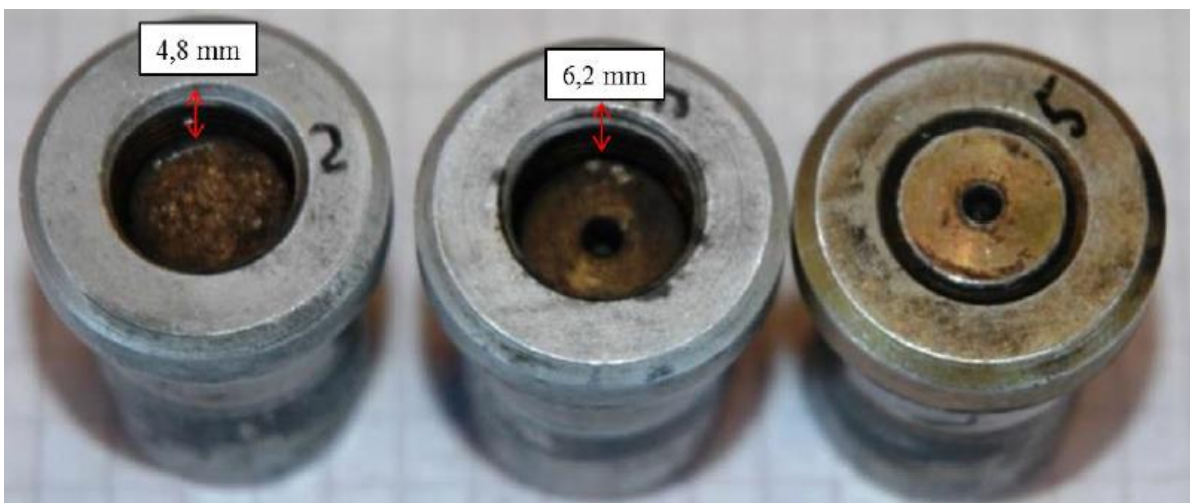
Bolt pieces screwed into bushings to varying degrees seen from the engine side. Photo: FLO materials lab
